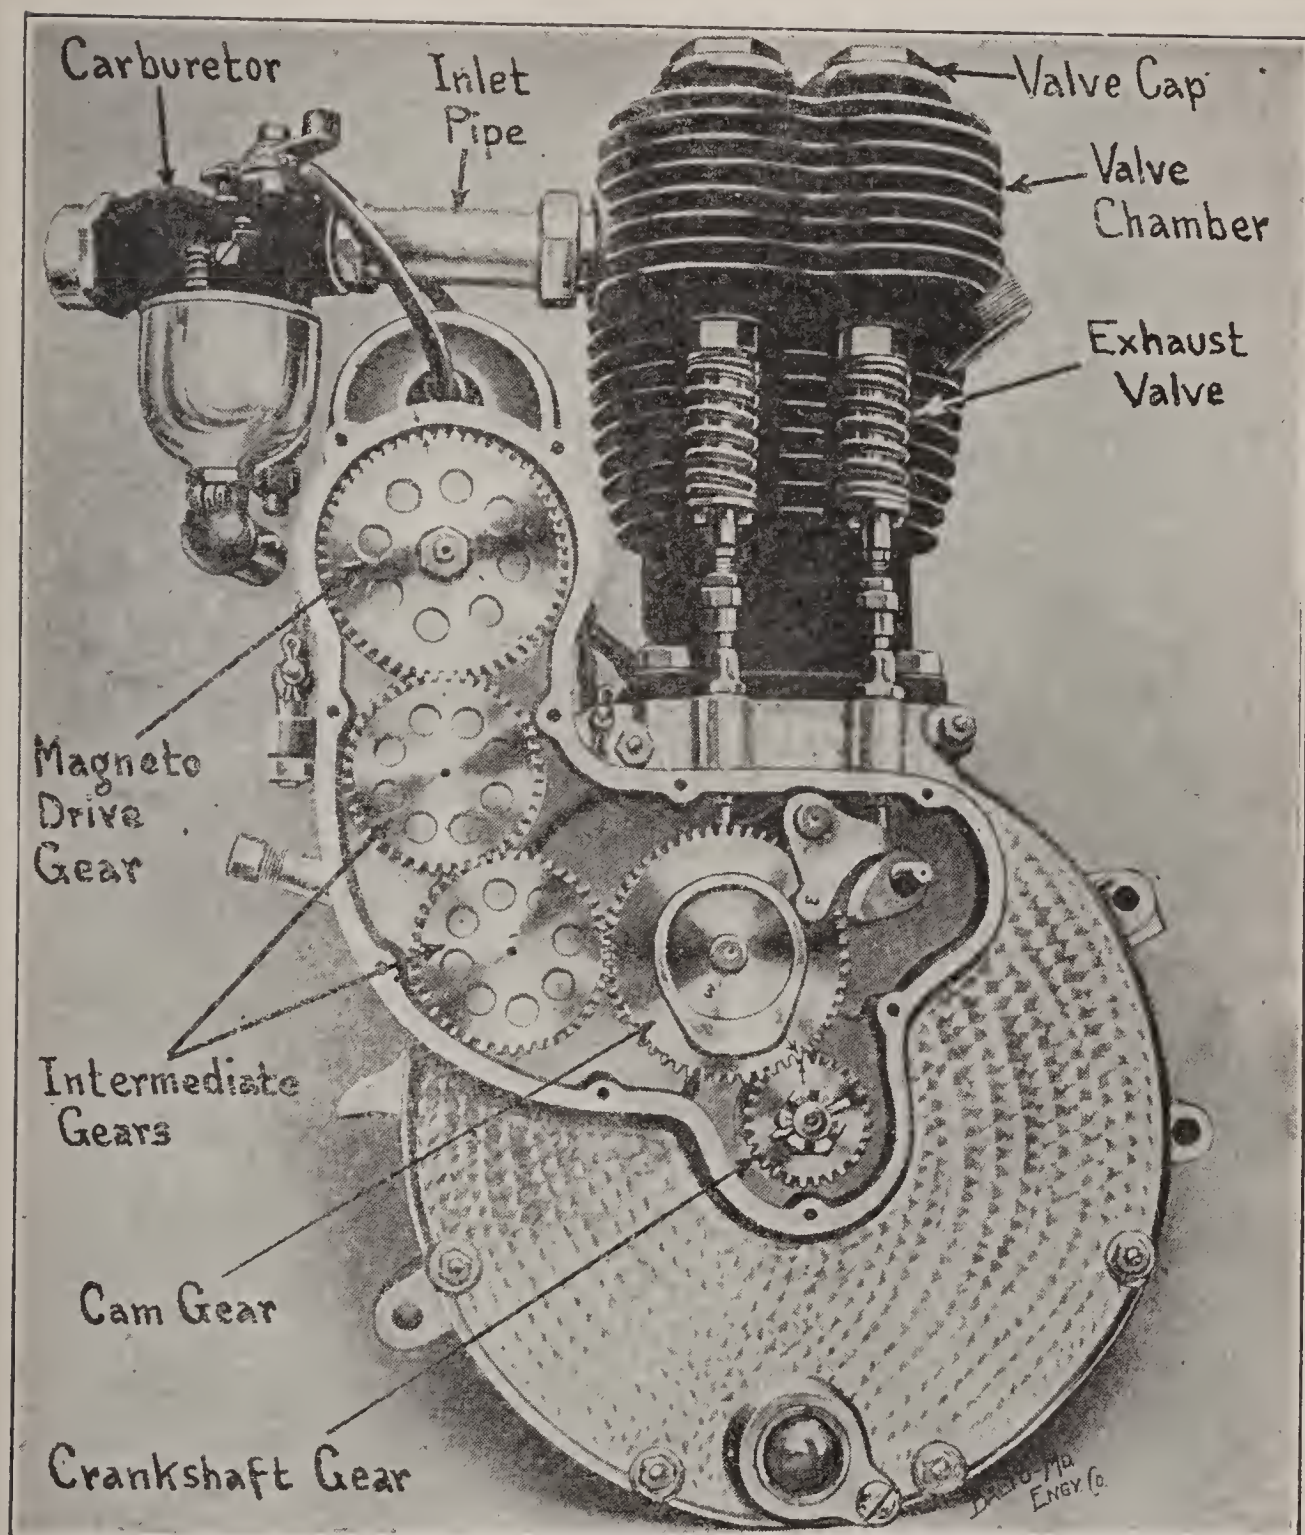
View of Reading-Standard Single Cylinder Motor With Timing Gear Case Cover Removed to Show Valve Operating Mechanism.
